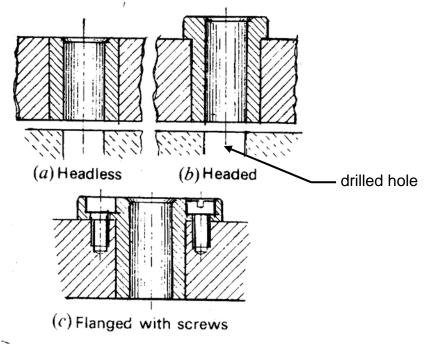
Bushes (a) without head, (b) with head and (c) flange.
